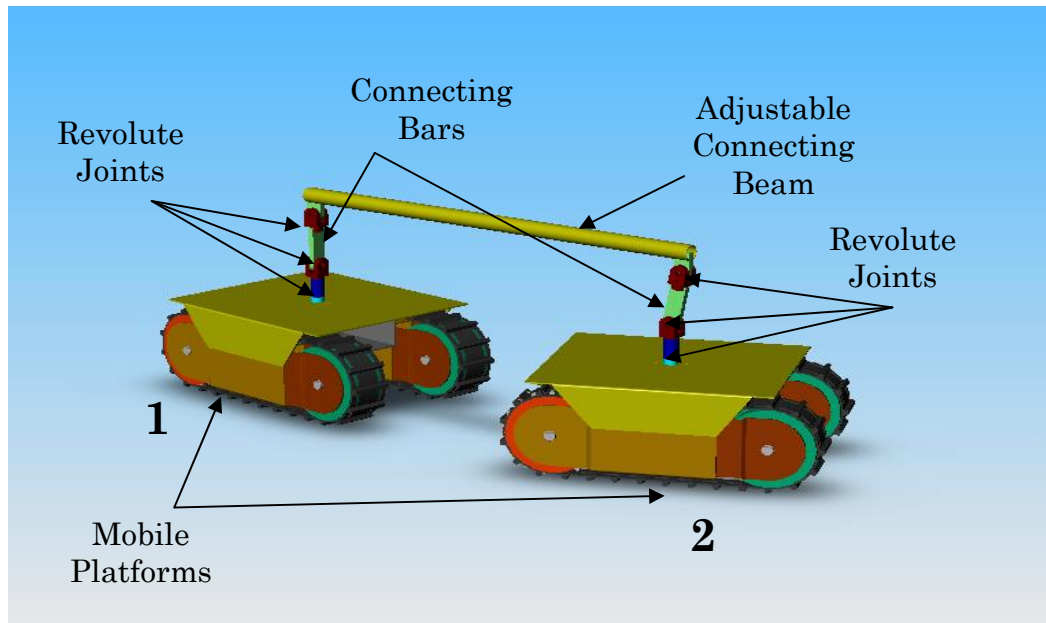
Schematic description of the robot, consisting of two tracked platforms, two connecting bars (on each platform), and one connecting beam. Six revolute joints join the connecting bars and beam to the platforms.
